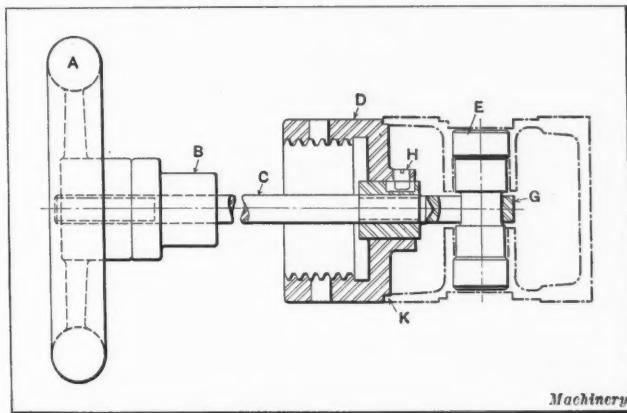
Chuck used in holding Piston for Turning and Grooving Operations
